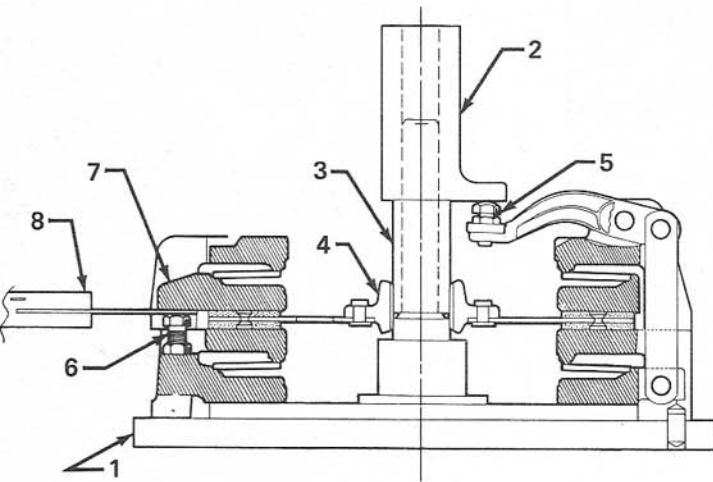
Clutch Disassembly; Removal of Release Lever Pivot Pin.
